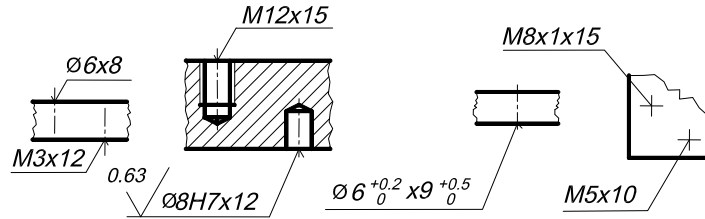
Conventional dimensioning of threaded blind bore-hole
